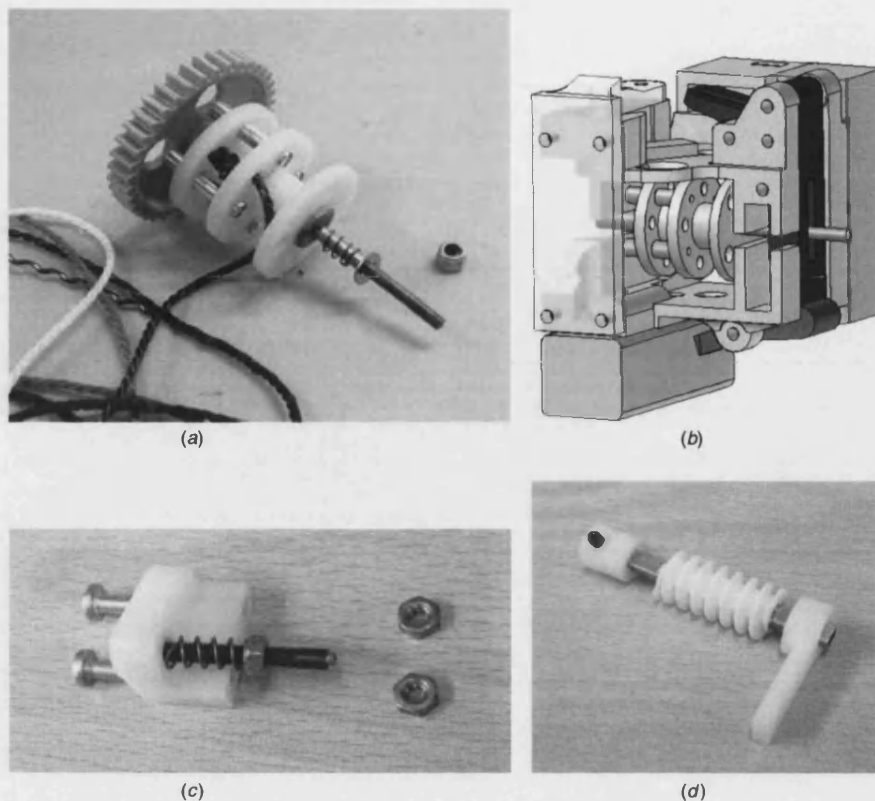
(a) Photo of the capstan shaft assembly, showing how it is driven by locating bolts through the drive gear on the left of the image, and the compression spring against which it can be released by pulling on this stepped shaft. (b) Rendering from Solid Edge v.17 of the control box showing the hinged lever (the darkest shaded component) and its retaining clip beneath (highlighted in a slightly lighter shade). Some components, such as the bi-stable mechanism and the gears have been omitted for clarity. (c) The bi-stable mechanism, consisting of a compression spring, a nut and bolt with a hemispherical end. (d) The worm gear sits on a brass square-section drive shaft, but is free to move along the axis such that rotation in one direction pushes the follower (shown on the right of the image) and the reverse direction turns the capstan driving gear shown in (b).
